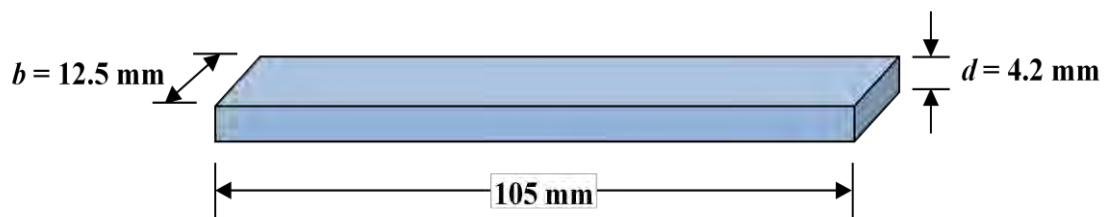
(a): Dimensions of a bar-shaped die.
